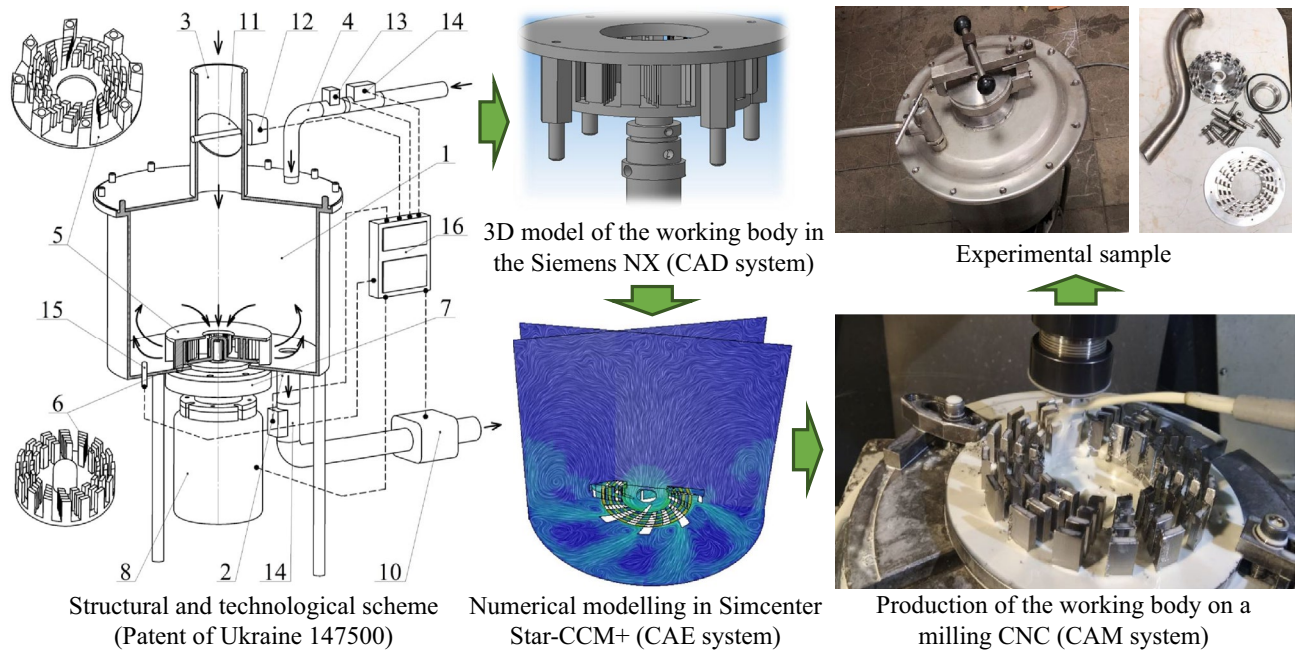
Stages of manufacturing an experimental sample of the homogenizer-disperser for liquid feeds. 1 – working vessel; 2 – discharge nozzle; 3 – nozzle for bulk components; 4 – nozzle for liquid components; 5 – stator; 6 – rotor; 7 – bearing unit; 8 – asynchronous motor; 9 – electrically operated valve; 10 – electric pump; 11 – valve; 12 – stepper motor; 13 – liquid flow sensor; 14 – electrically operated valve; 15 – temperature sensor; 16 – control unit.
